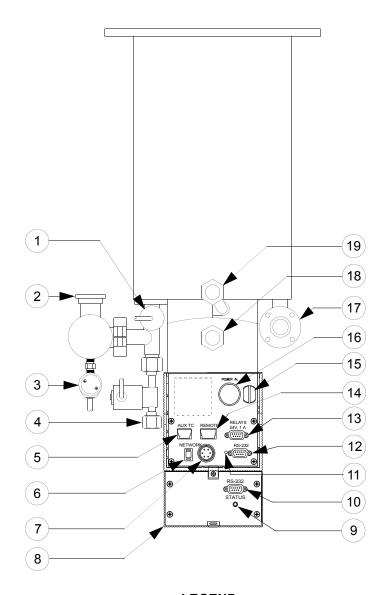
Cutaway View of a Typical On-Board 8 GLE Cryopump Vessel
